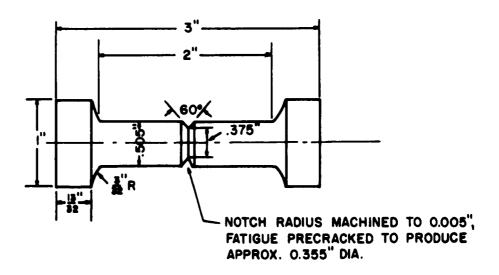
CENTER PRECRACKED NOTCH TENSILE SPECIMEN
